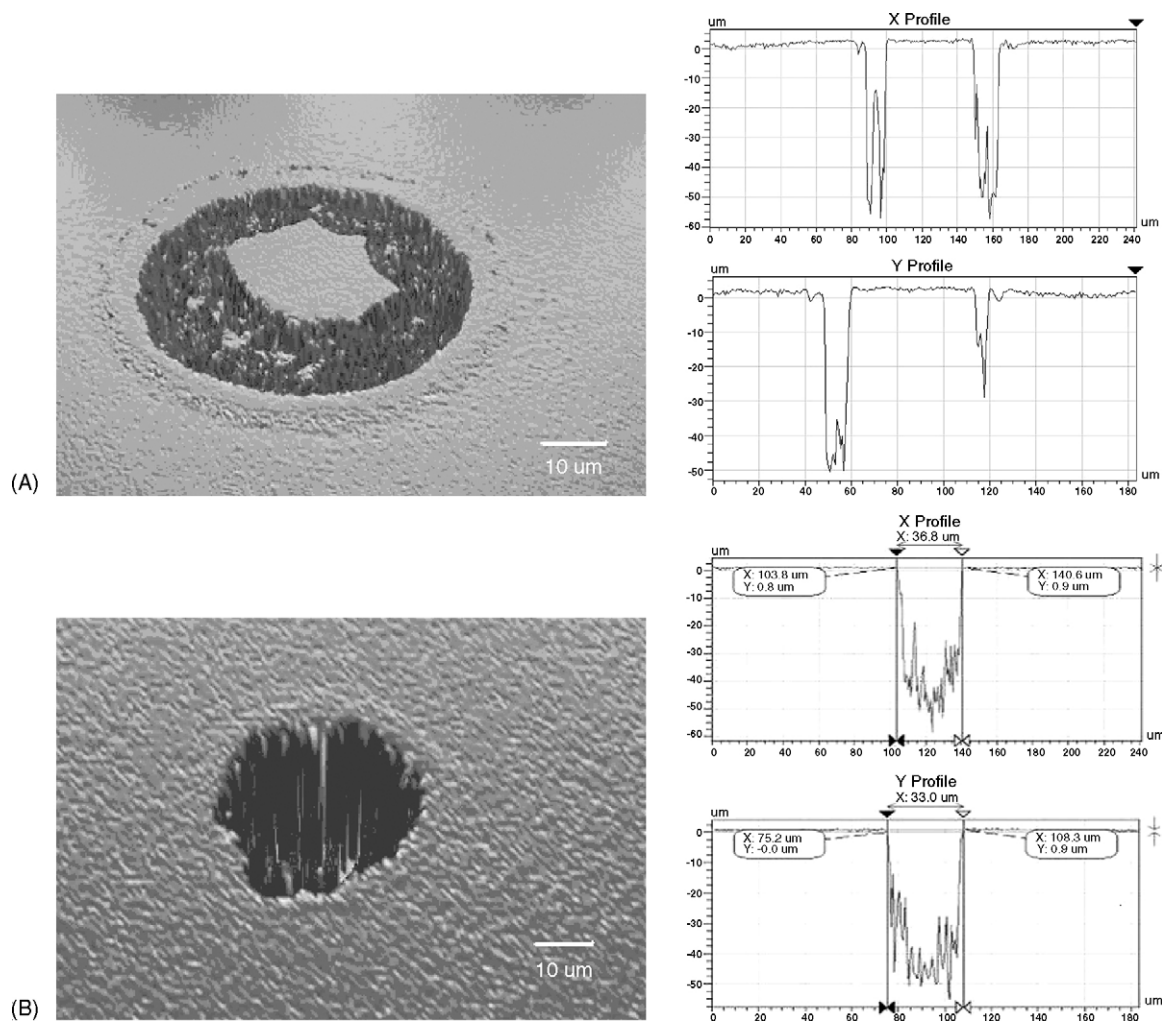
(A) 3D and cross-section view of holes with materials remain in the center. (B) 3D and cross-section view for a “cleaner” hole. Diameter of the via can be found from the cross-section view on the right.
